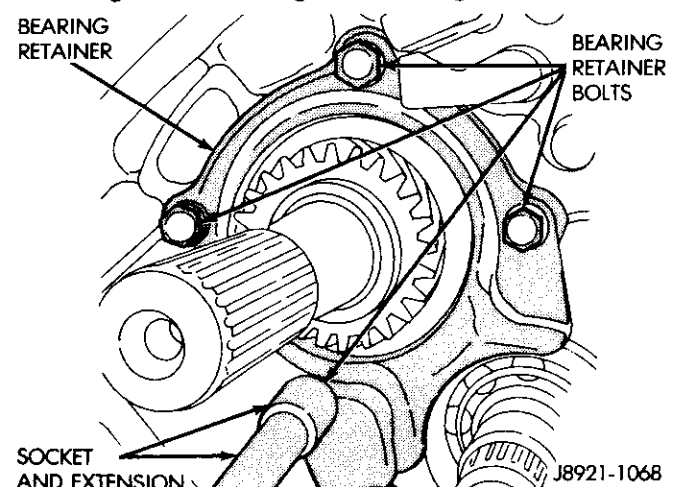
Removing Output Shaft Rear Bearing Retainer Bolts
